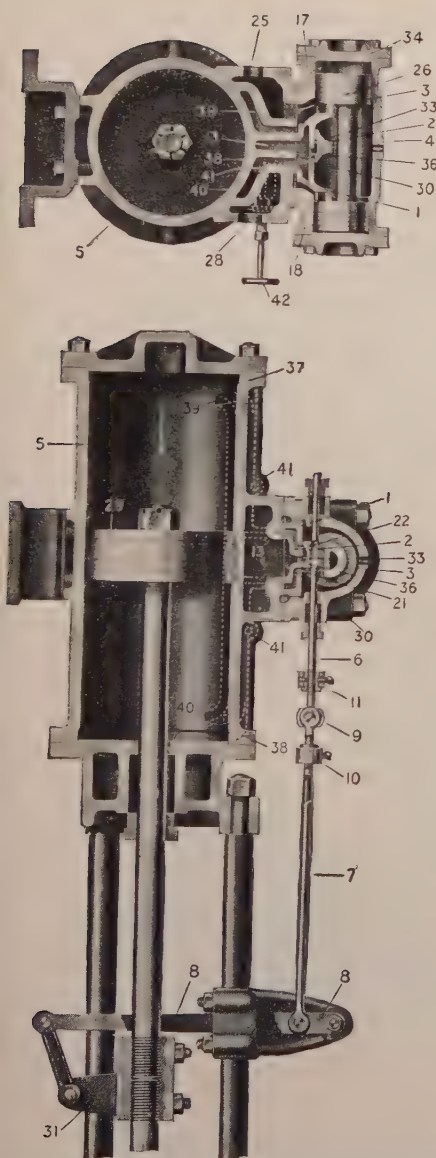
Sectional view of Vertical Simplex Style "A" Steam End. Sizes with steam cylinders larger than 10 inches in diameter.
